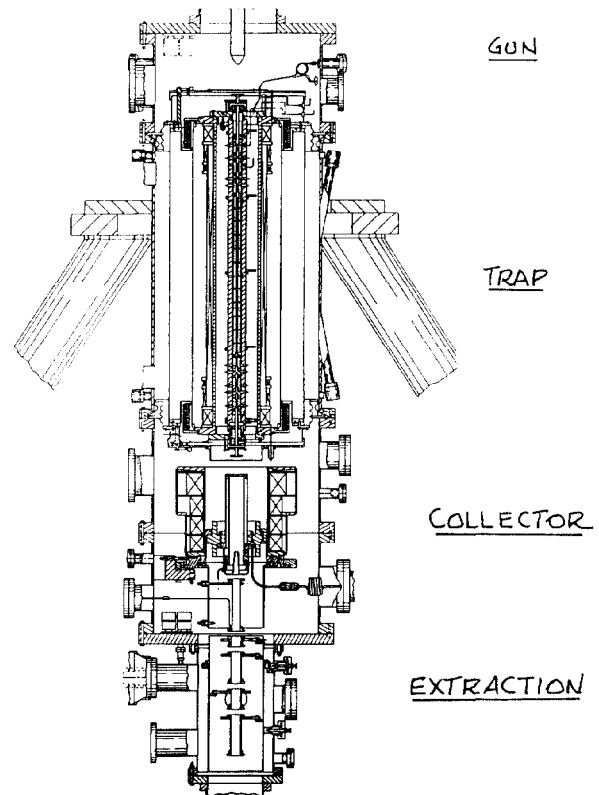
Cross sectional drawing of the Super-EBIS.
